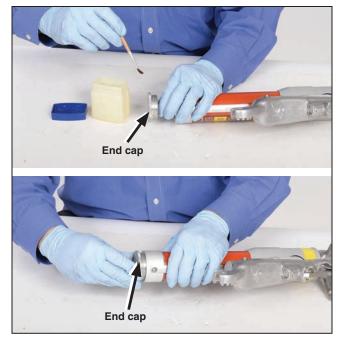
Lubricate the threads of the end cap, and screw the end cap into the chassis.
